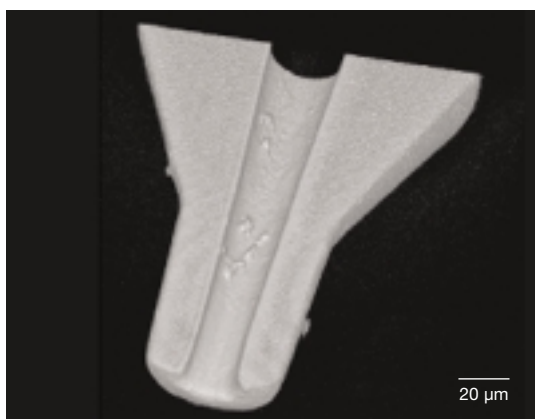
3D view of wire bonding capillaries for extracting dimensions and details of shape.
